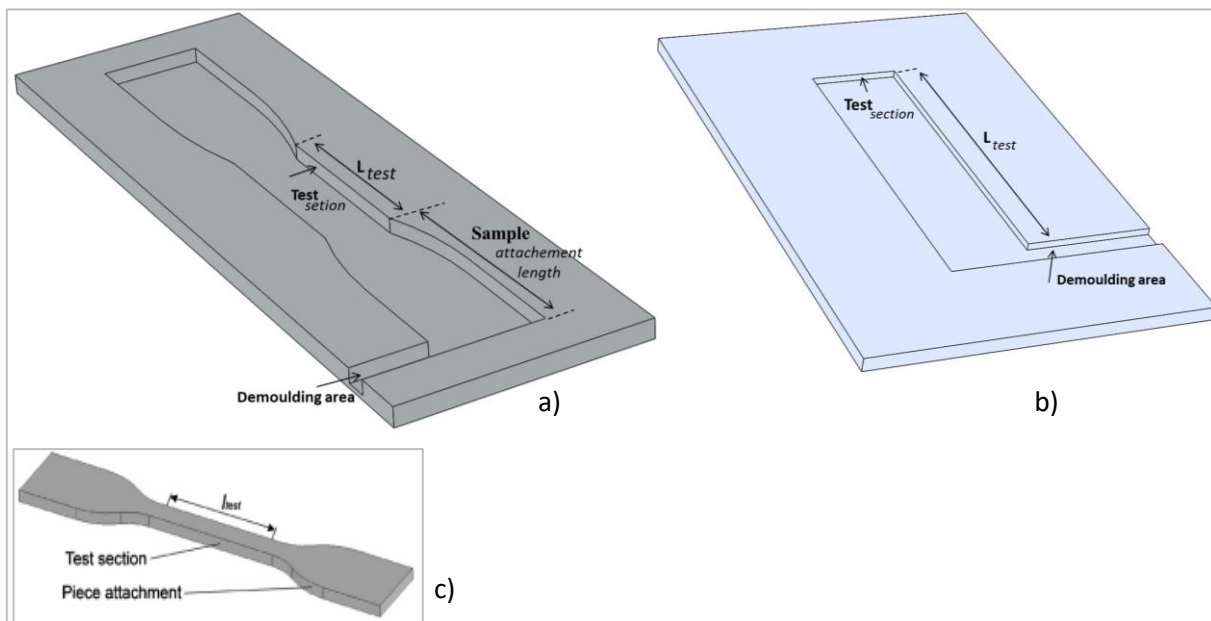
a) Mould for shouldered test bar, denoted sample B (thickness of 3 mm); b) Mould for rectangular samples, denoted B (thickness of 1mm); c) 3D Shouldered test bar (sample B) according to DIN53504 [110].
